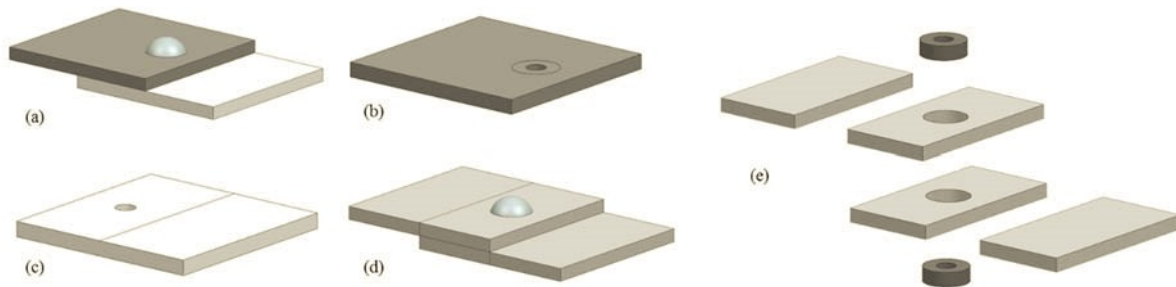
Thin-sheet identification for riveted plate assembly: (a) assembly; (b) rivet imprint on top plate; (c) imprint between plates; (d) thin-sheet decomposition; (e) exploded view of assembly decomposition with thin-sheet regions light grey and thick region
